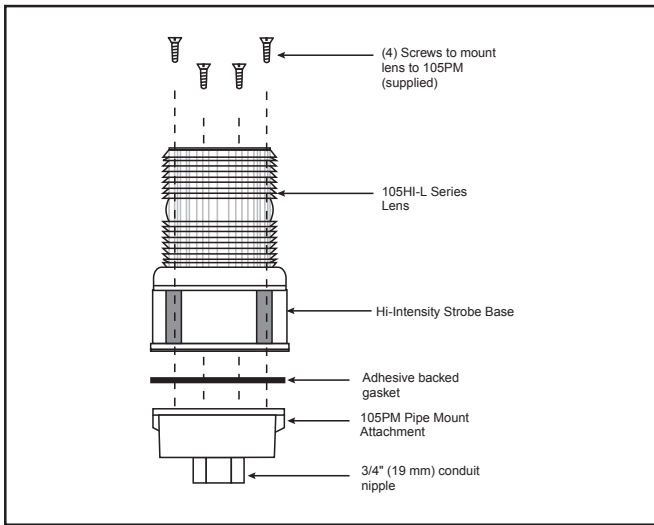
Securing the 105HIST Beacon to the Mounting Attachment (Pipe Mount Attachment shown)
